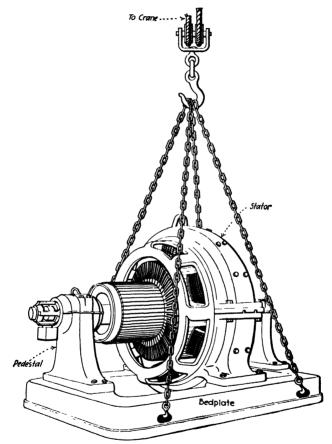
Showing how a small machine may be lifted with a crane. (Brush rigging and brushes removed.)
